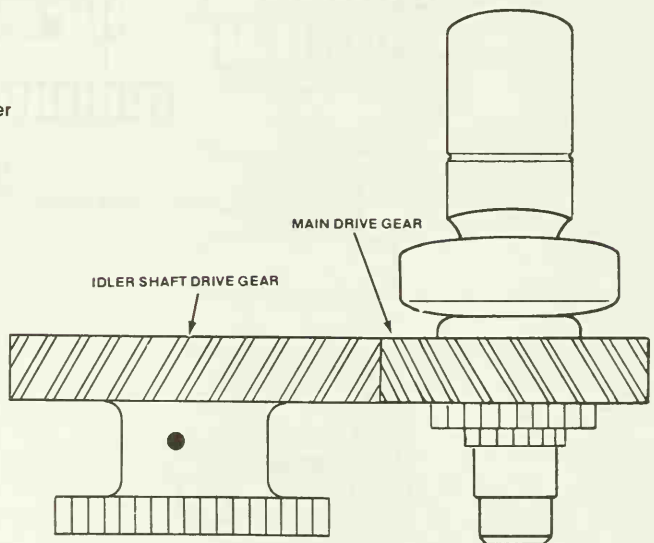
The idler shaft gears mesh with the main drive gear.
